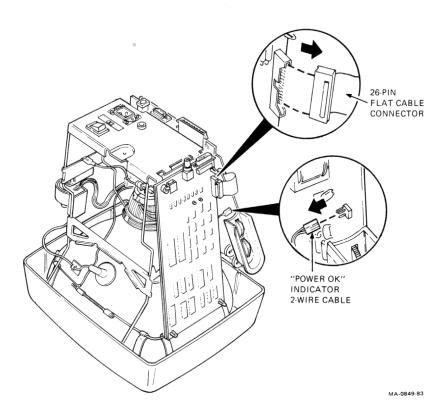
Disconnecting the Flat Cable and the "Power OK"
